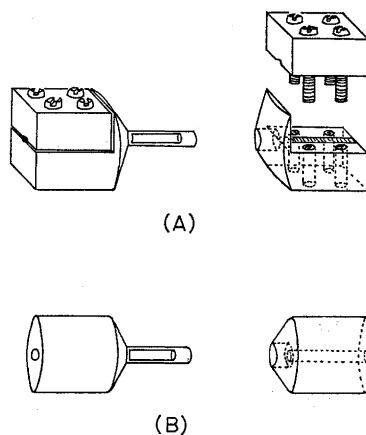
Chucks which fix a rod specimen with the screw (A) and the solder (B). The weight of a small chuck is two grams.
